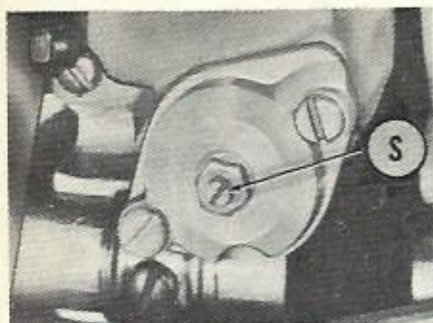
View of "Lube-Assist" assembly installed showing location of adjusting screw (S). Unit is located in oil tank cover on direct drive saws or at left lower side of gearbox housing on gear drive models.
